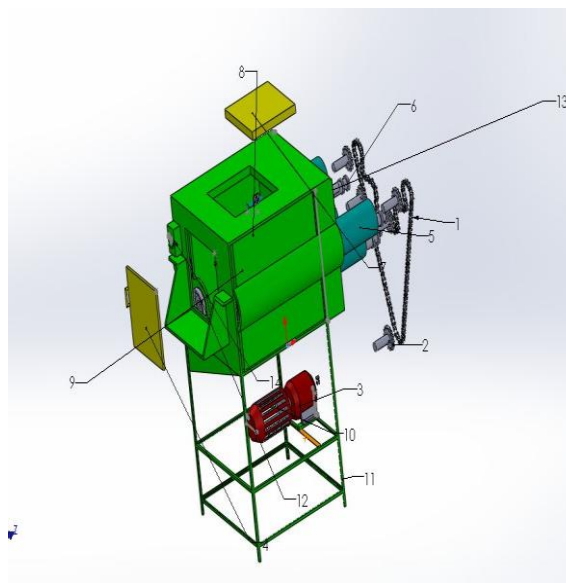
Isometric view of the multi-roller cassava peeling machine. Legend: 1.Chain; 2. Driver Sprocket; 3.Gearbox; 4.Outlet Chute opener; 5.Abrasive surface (Emery Cloth); 6. Idler Sprocket; 7.Feed section opener; 8.Peeling chamber; 9.Peeling Chamber; 10.Electric motor; 11.Main Fram; 12.Peeling Rollers; 13.Peeling roller driven sprocket; 14.Electric switch.
